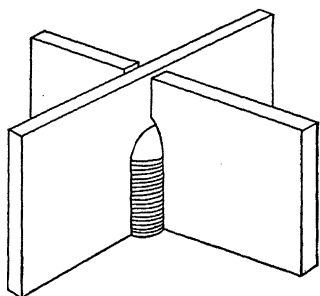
Cross weld. The weld puddle is long and sloping.
